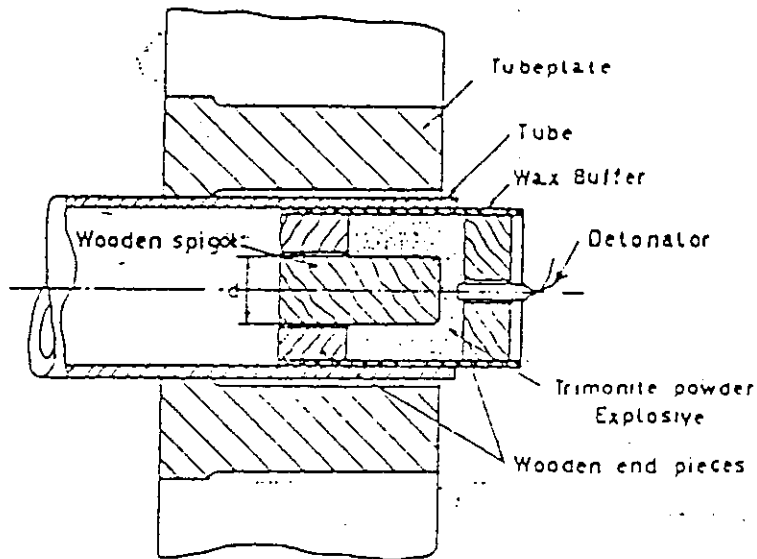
Experimental set-up for welding tubes to tube plates after Ref.[1]
